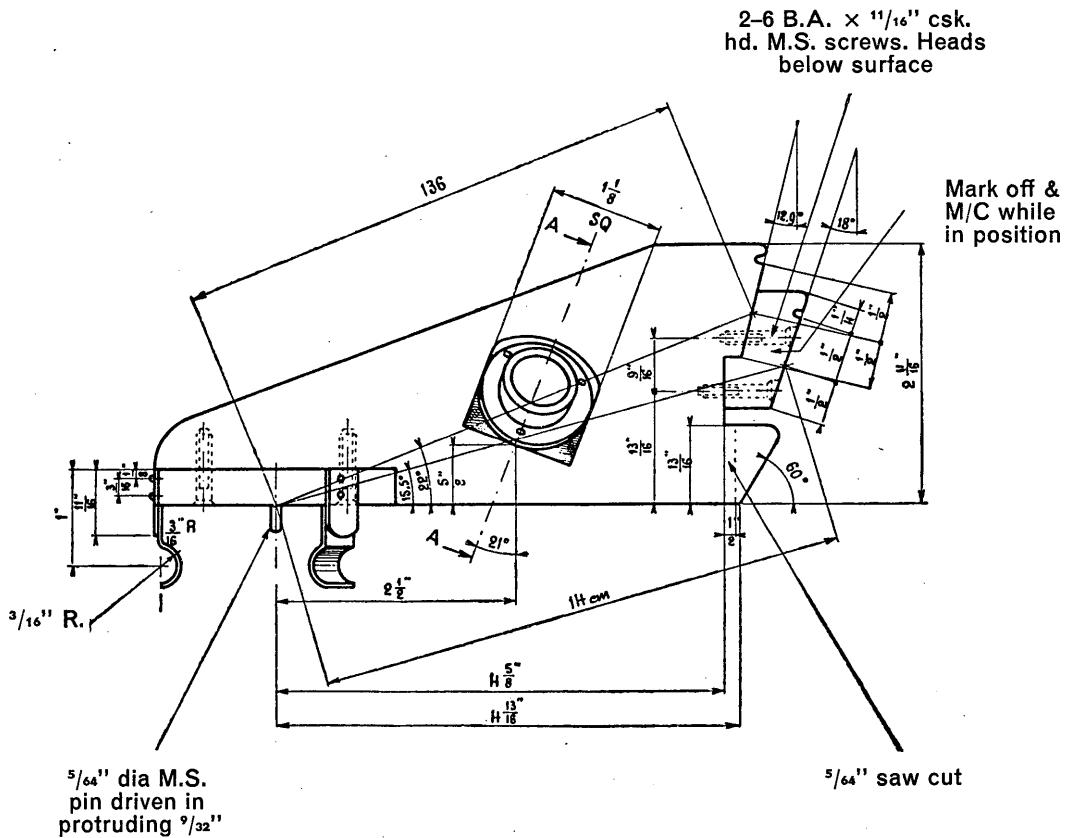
/P.45. — Type of gauge used for setting the handsets in articulation tests at the C.C.I.T.T. Laboratory
